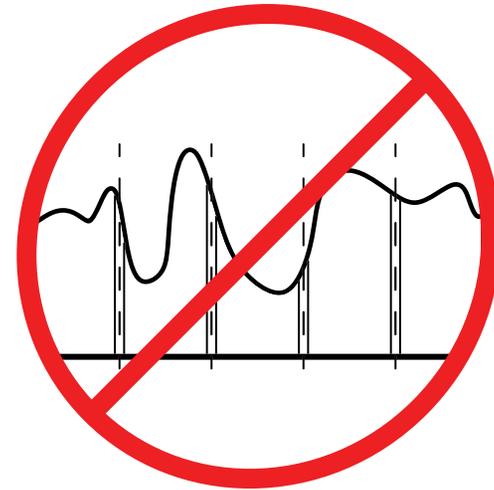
Same mold produced via pin-point forming showing misalignment of pins with quadrants of surface
